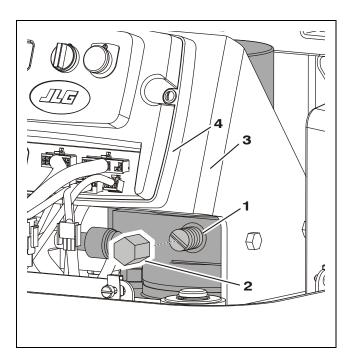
Hydraulic Pressure Adjustment Screw. (Machine Front Cover Removed)
